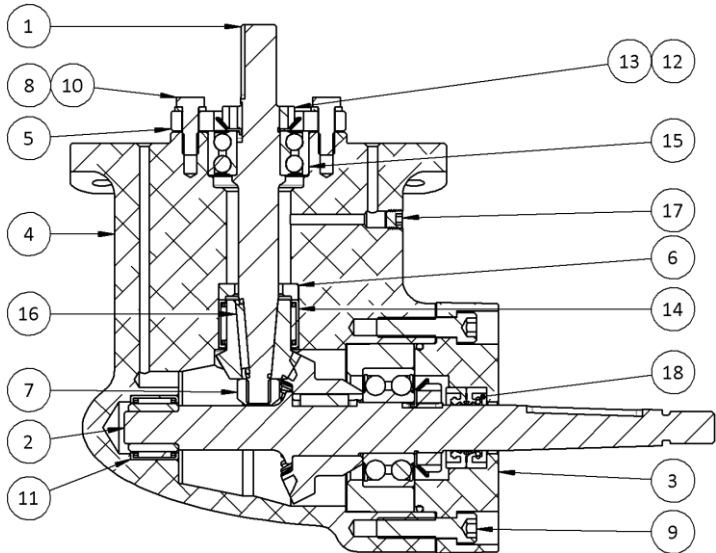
KP08/KP10 Leg Subassembly Parts List
